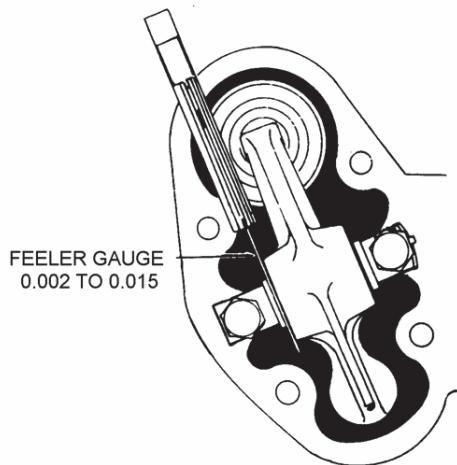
Crossflow Cylinder Rocker Arm Side Clearance
